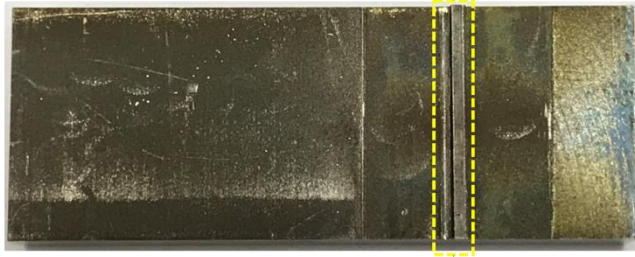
Optical micrographs – fracture surface morphology of shear test specimen (3)
